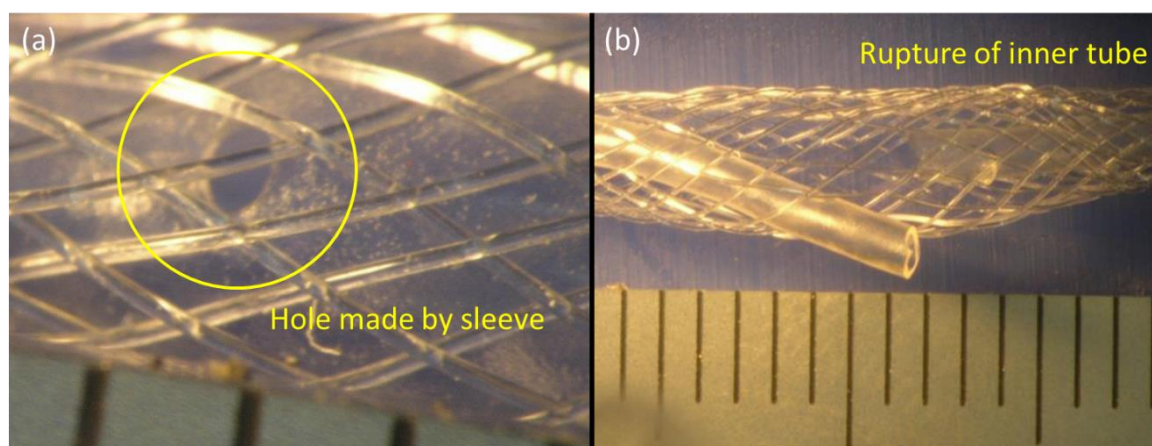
Example of (a) hole made on inner tube by sleeve and (b) rupture of inner tube.
